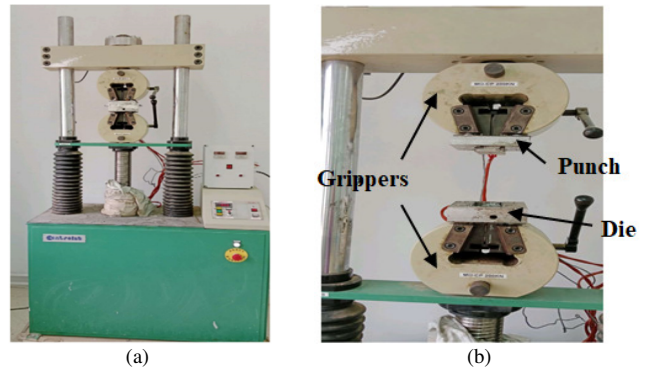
Experimental set-up for the elaboration of the new material: (a) PLA/PO compression phase, (b) die/punch after the disassembly of the PLA/PO plate.
